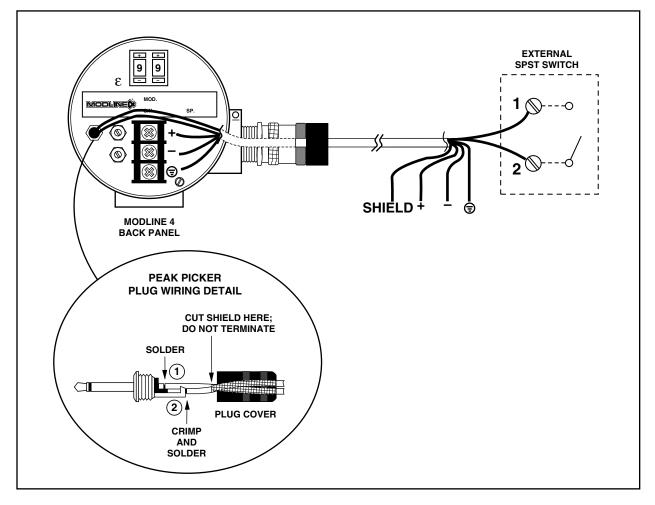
PEAK PICKER CABLE AND SWITCH WRING
